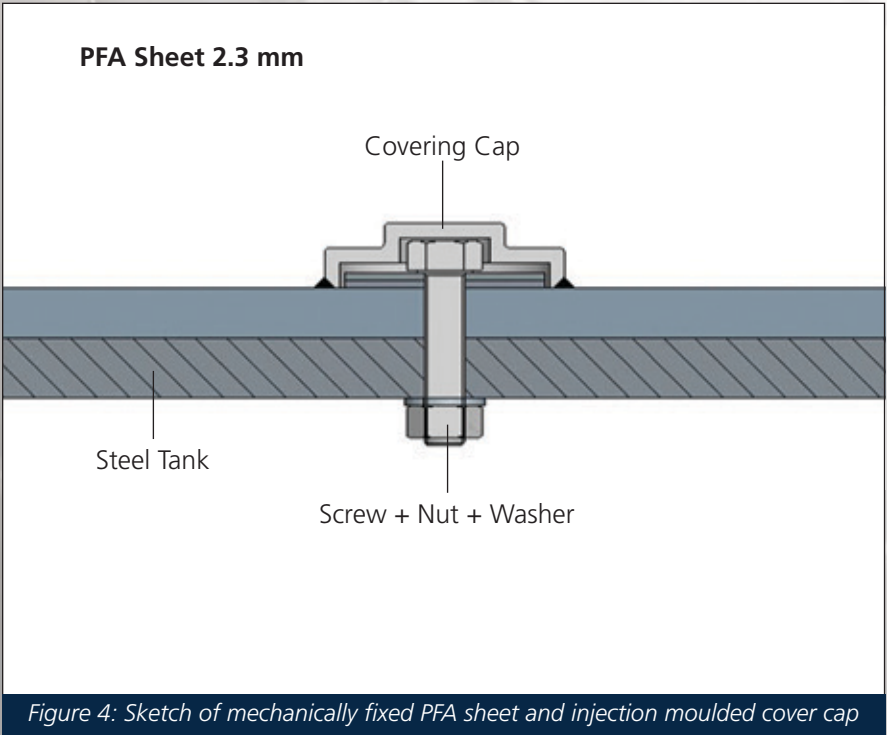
Sketch of mechanically fixed PFA sheet and injection moulded cover cap
